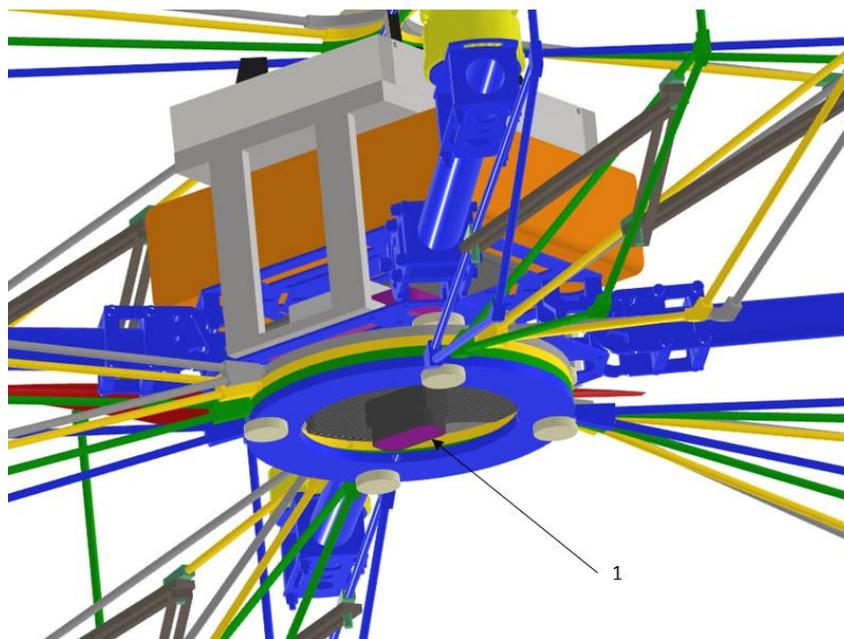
View of the sensor paced on the bottom side of the cage 1) TFmini Plus
